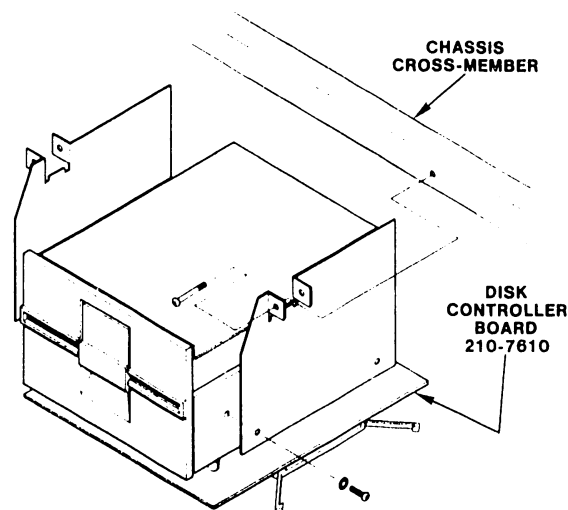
MINI-FLOPPY DRIVE REMOVAL
